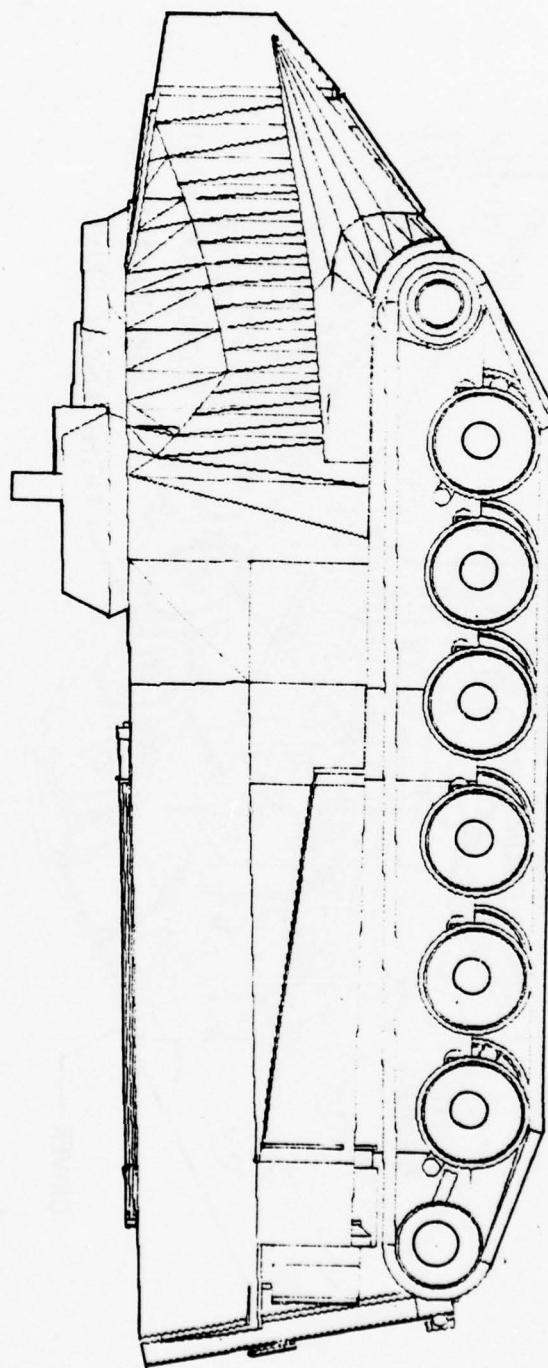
Computer Drawing of the Right Side of the LVTP-7
